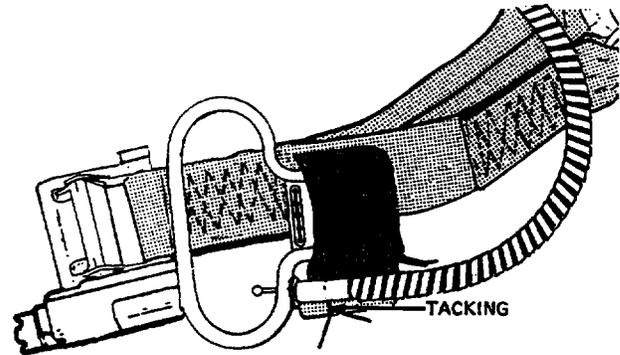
Insert Ripcord Housing Clip 6.2-6044B
